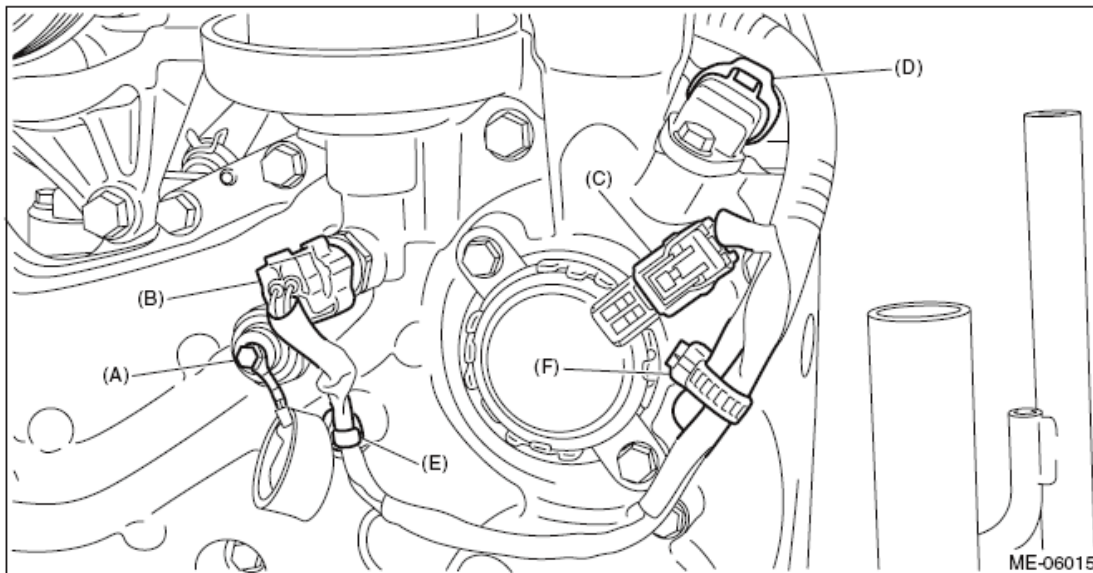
Identifying Engine Oil Temperature Sensor, Connector, Terminal And Clip
